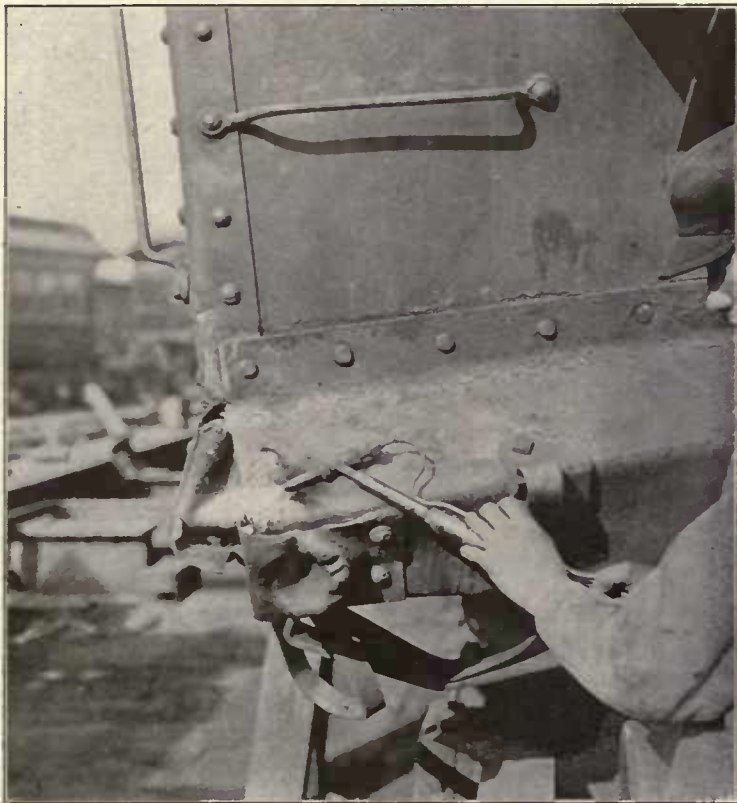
Cutting Off Rivet Heads on End of Steel Car.
